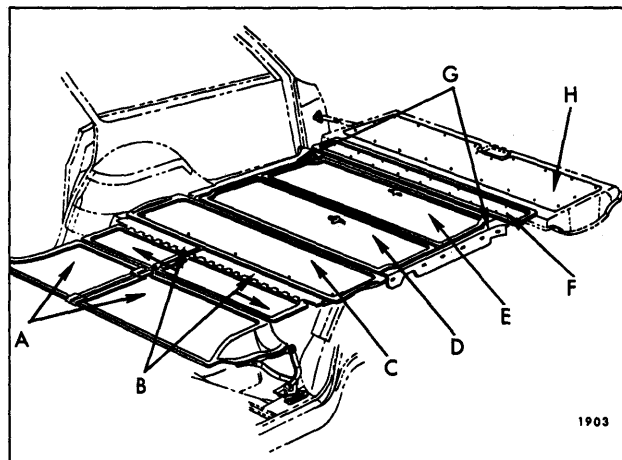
Folding Seats and Floor Panels - Pontiac "B-45" Styles
